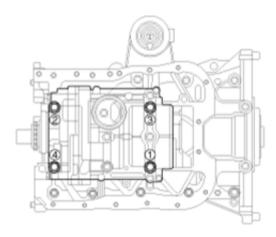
Identifying Tightening Sequence Of Bolts (2.4 BSM) Courtesy of KIA MOTORS AMERICA, INC.
